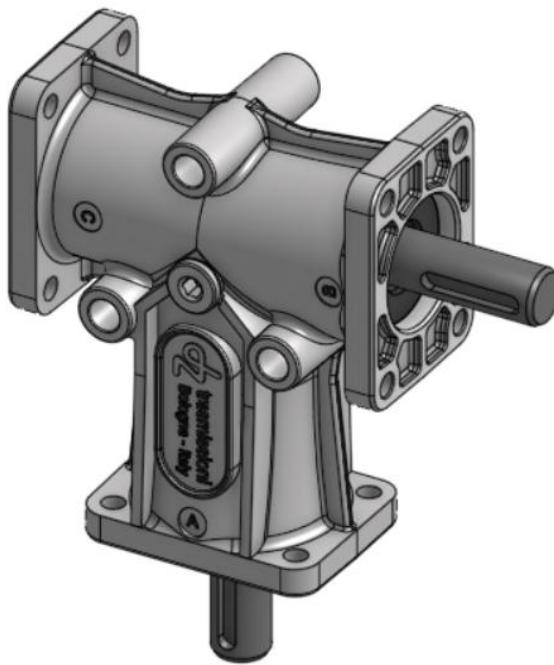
Steering Bevel Gearbox - DZ 20S 3FAB
